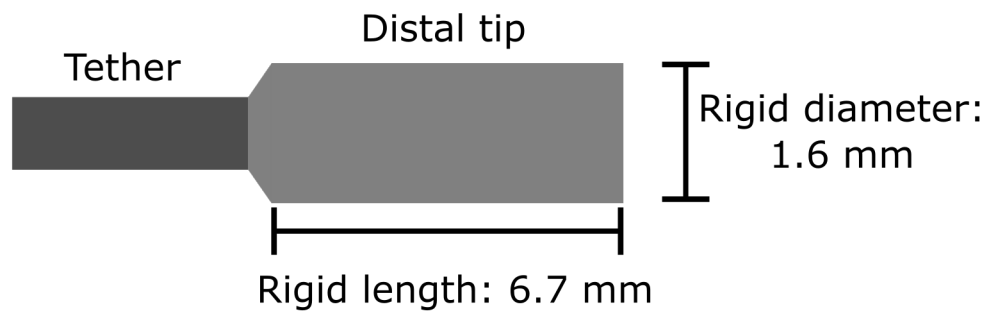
Rigid tip dimensions of a chip-on-tip probe.
